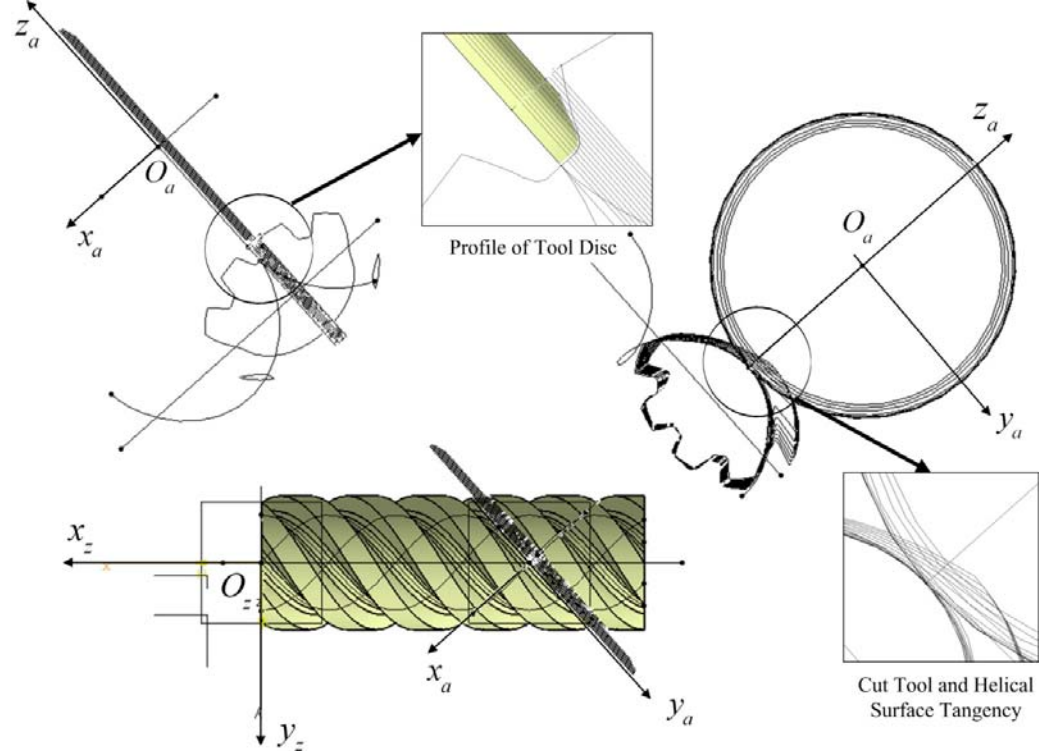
Geometrical analysis of grind tool and helical surface tangency – generation of tool profile
